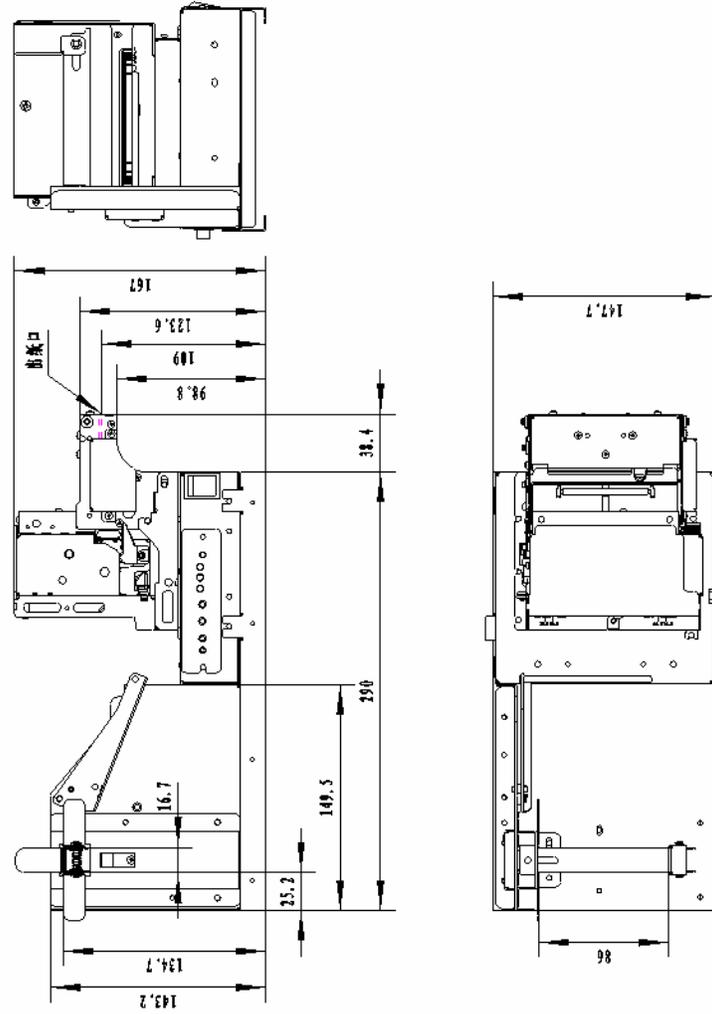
The printer size compatible with MTP7632 horizontal paper holder
